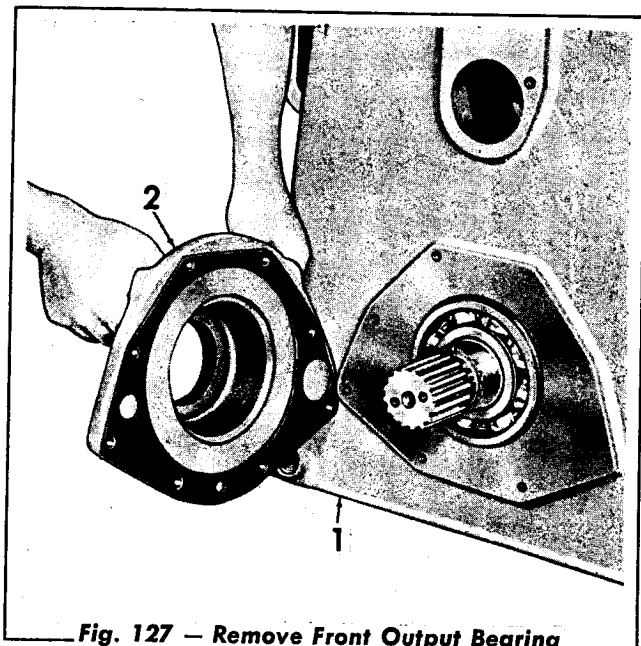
Remove Front Output Bearing Retainer Assembly
